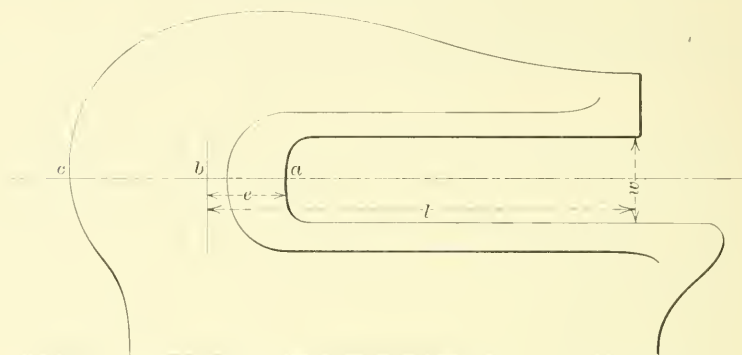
MACHINE-TOOL FRAME CONSIDERED AS A LOADED BEAM
